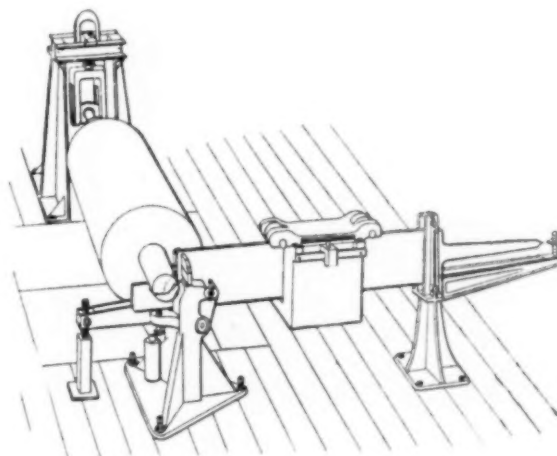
MARTIN ROTOR-BALANCING MACHINE
